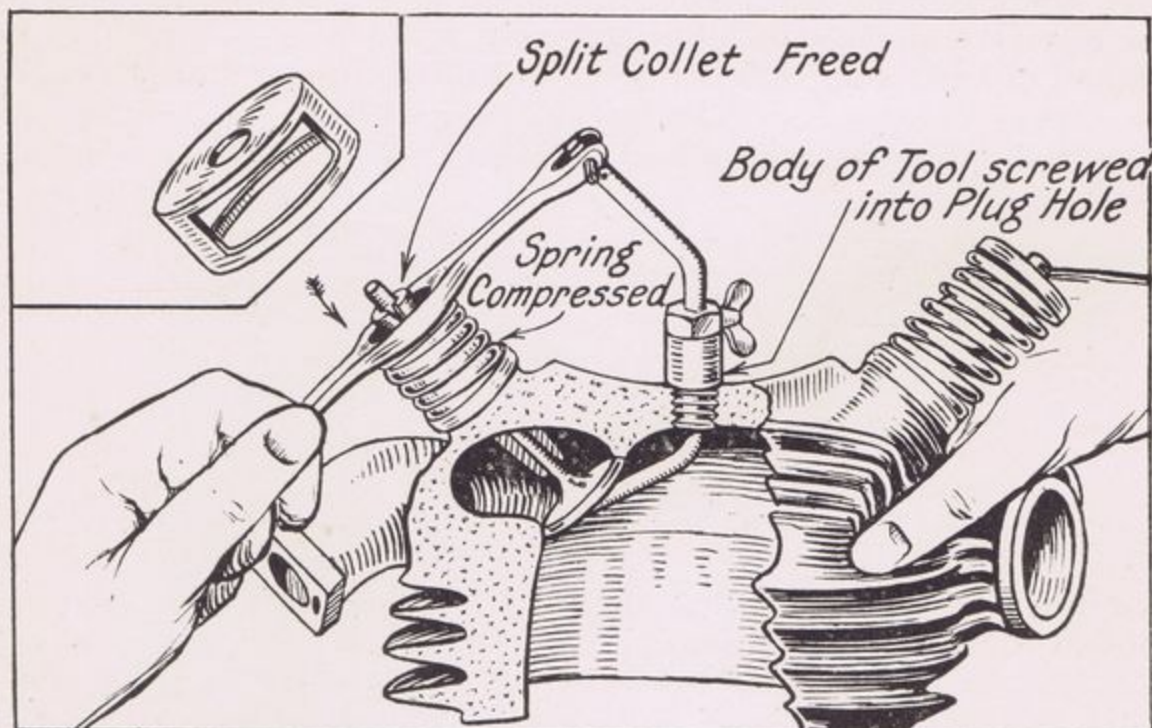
REMOVING OVERHEAD VALVE WITH HICKMAN SPRING COMPRESSOR
